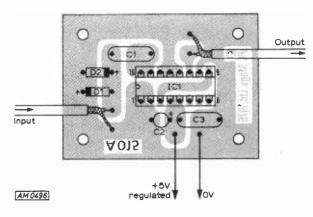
Full size drawings of the PCB required for this project. This design is recommended if instability is to be avoided.
